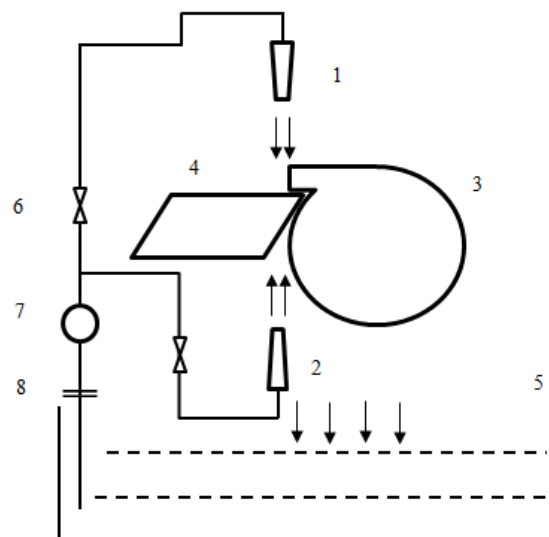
The schematic of the application of the flood cutting fluid on the rake face and flank side (1) nozzle toward rake face (2) nozzle toward flank side (3) workpiece (4) tool insert (5) cutting fluid tank (6) control valve (7) pump and (8) filter
